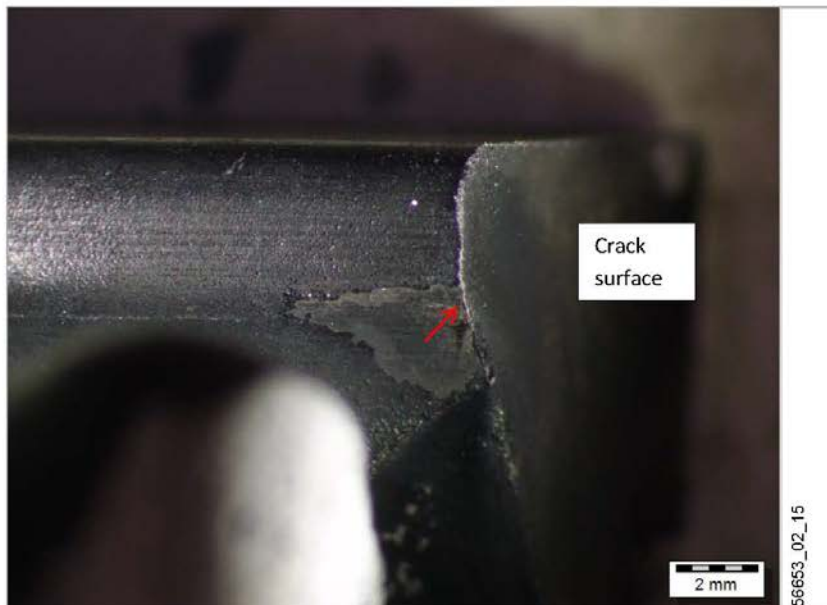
Overview of the fracture induction, no mechanical defects detectable
